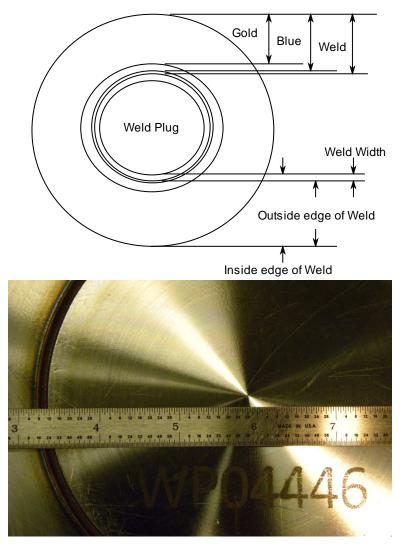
(a) Schematic of heat tint measurement approach and (b) a photo of test nozzle weld plug WP04446.
